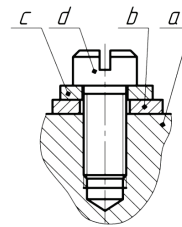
Schematic drawings of a simple assembly unit with $K^c = K^p = 0.5$:
